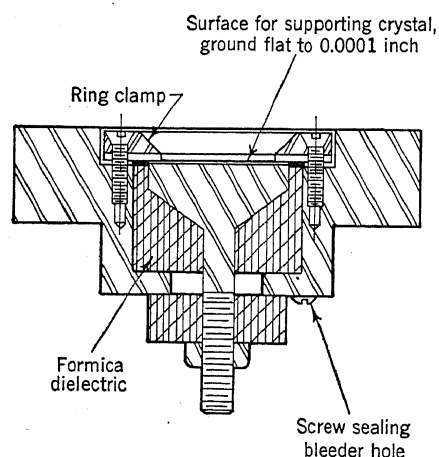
End assembly for mounting 30-Mc/sec crystals, Line *C*.
